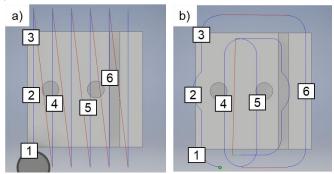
Face milling critical situations a) Shopmill b) designed tool path
